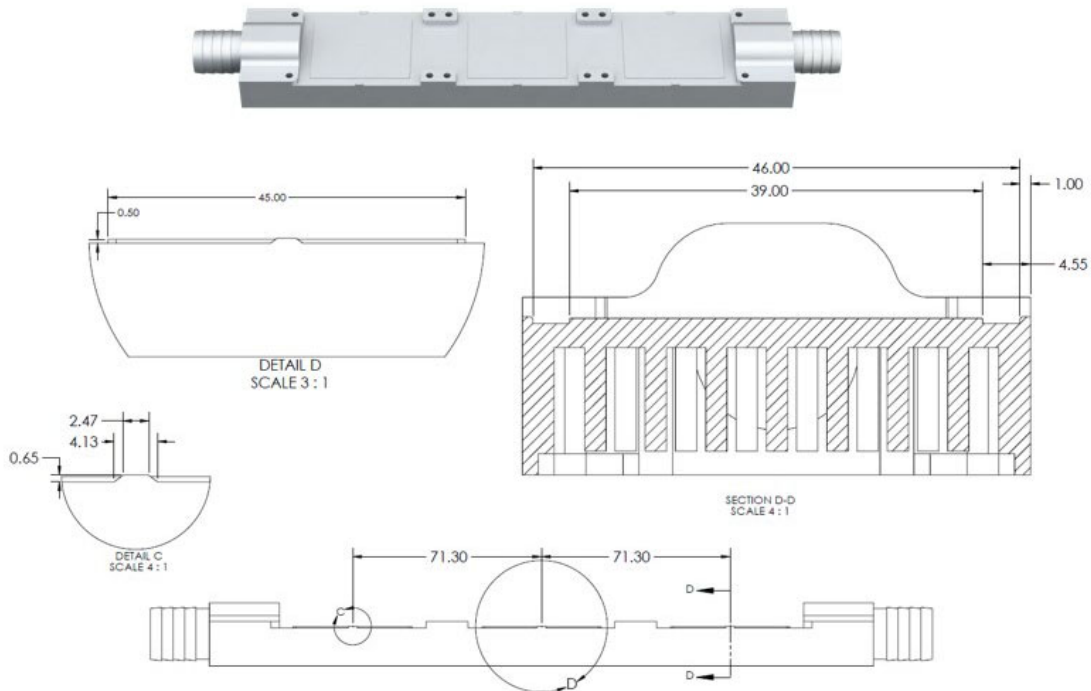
Alignment Feature to be Included on the Bottom Half of the Cooler
